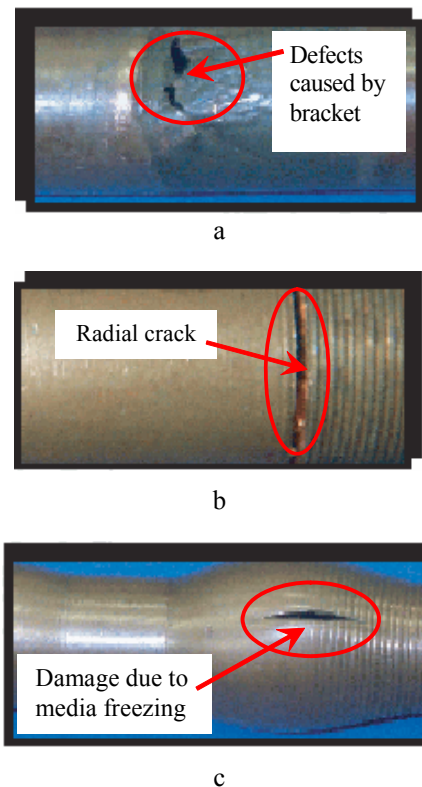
Examples of damaged connecting pipes of heat exchanger: a – defects caused by bracket inadequacy; b – damage due to corrosion and incorrect fixation; c – damage due to media freezing
